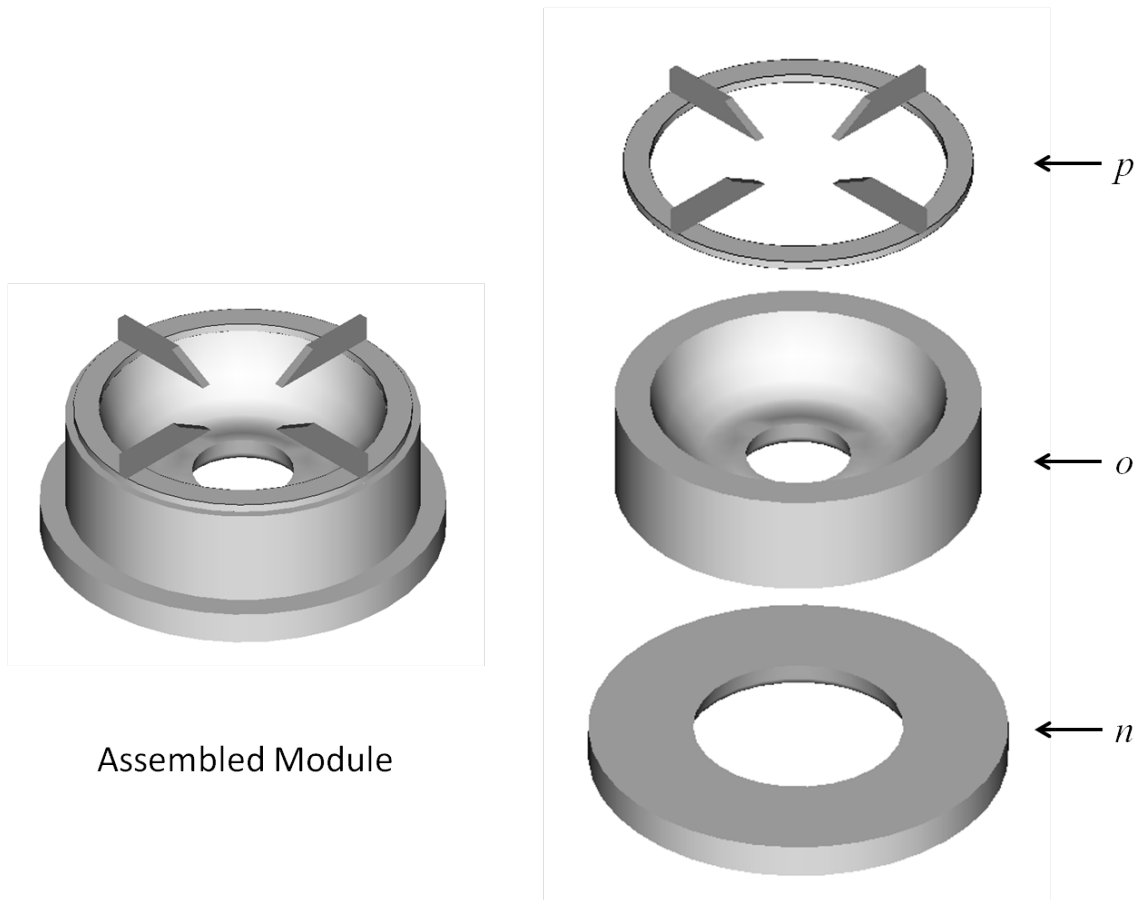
Gas Burner Module components: (*n*) burner support ring, (*o*) nozzle orifice and riser, and (*p*) cooking pot support ring.
